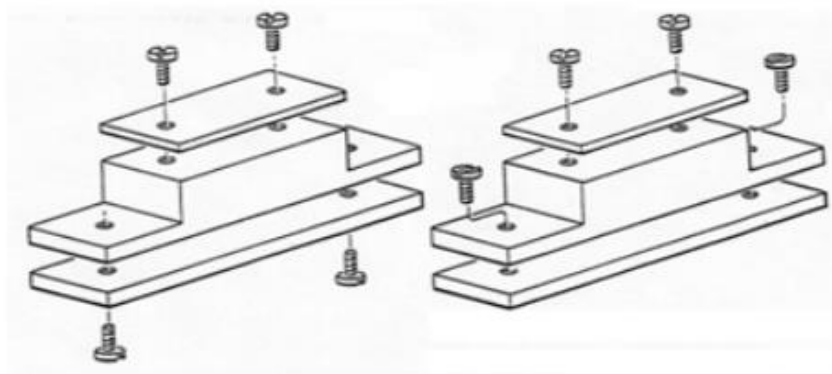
Example of optimized singular fastening direction (Moultrie 2012)
